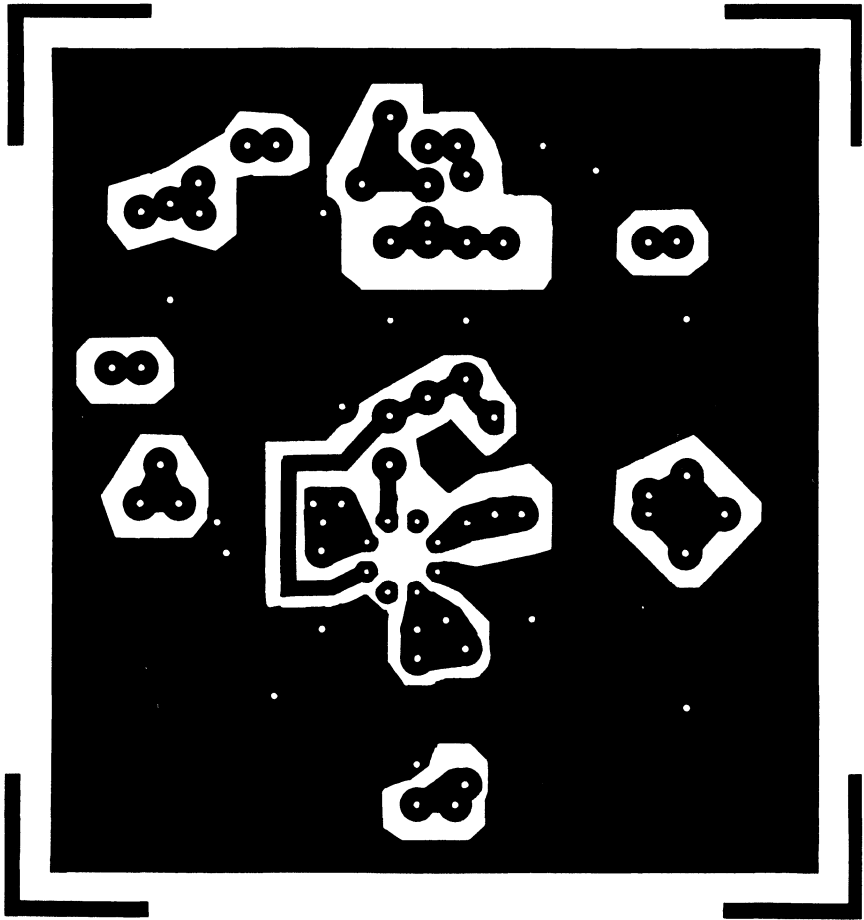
Printed circuit board layout for LF400 settling time test circuit. Foil side is shown.
